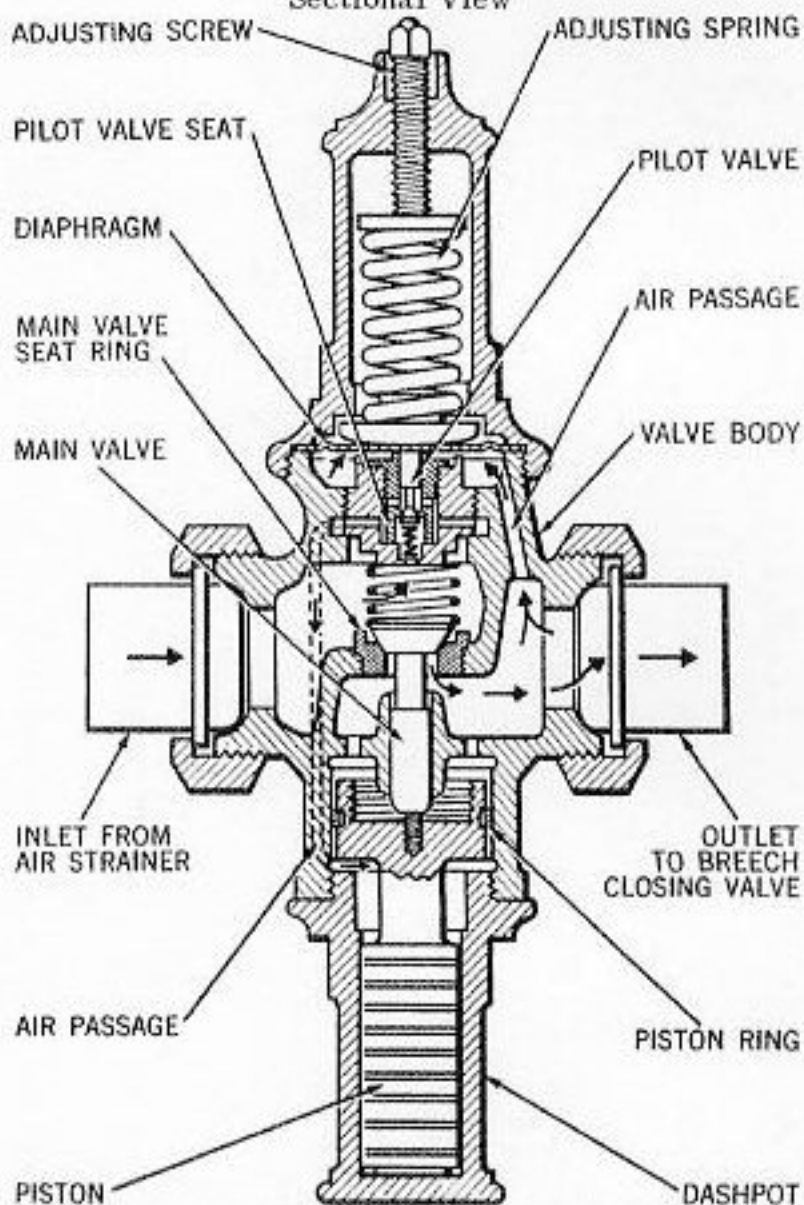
Breech Mechanism Air Reduction Valve, Mason Type, Sectional View
